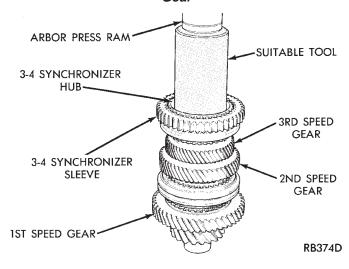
Install 3-4 Synchronizer Hub and 3rd Speed Gear
